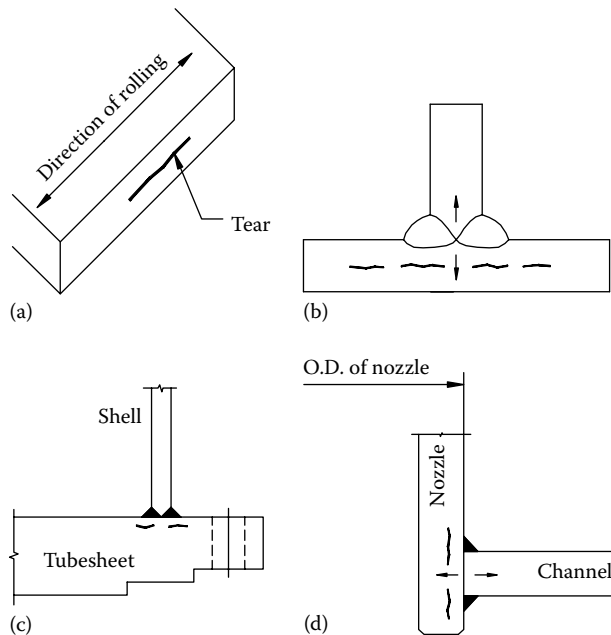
Lamellar tearing principle and susceptible welded joints: (a) Lamellar tearing due to planar inclusion lying parallel to the surface, (b) Lamellar tearing susceptible welded T-joint, (c) Shell to fixed tubesheet joint and (d) T-joint such as nozzle set through a rigid plane like channel.
